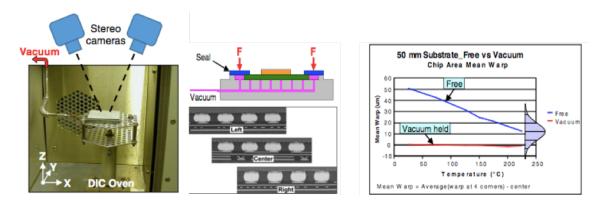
Vacuum fixture with carrier during mass reflow (left), uniform ball height cross-section (middle), warpage with and without vacuum fixture (right).
